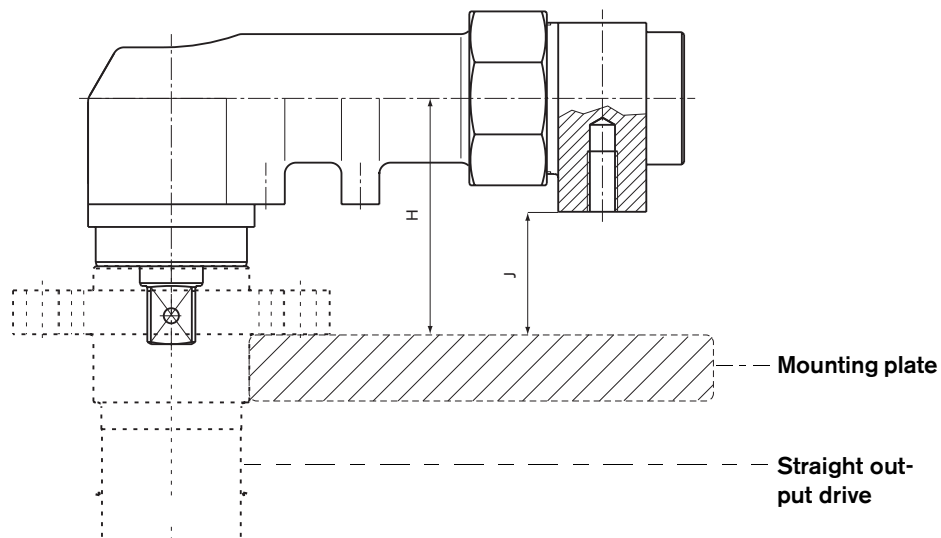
Main dimensions for the installation on a mounting plate (angle head with axial compensator)
